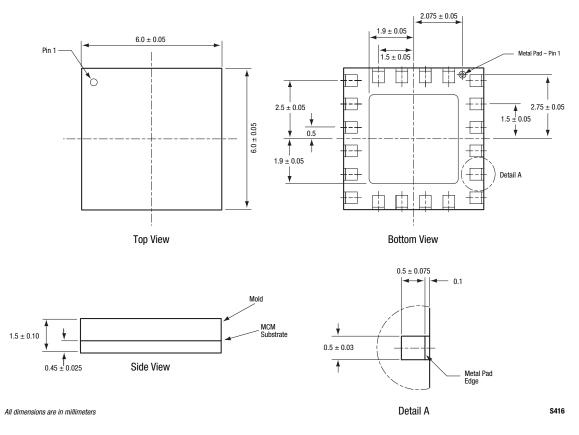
SKY65132 20-Pin MCM Package Dimensions
